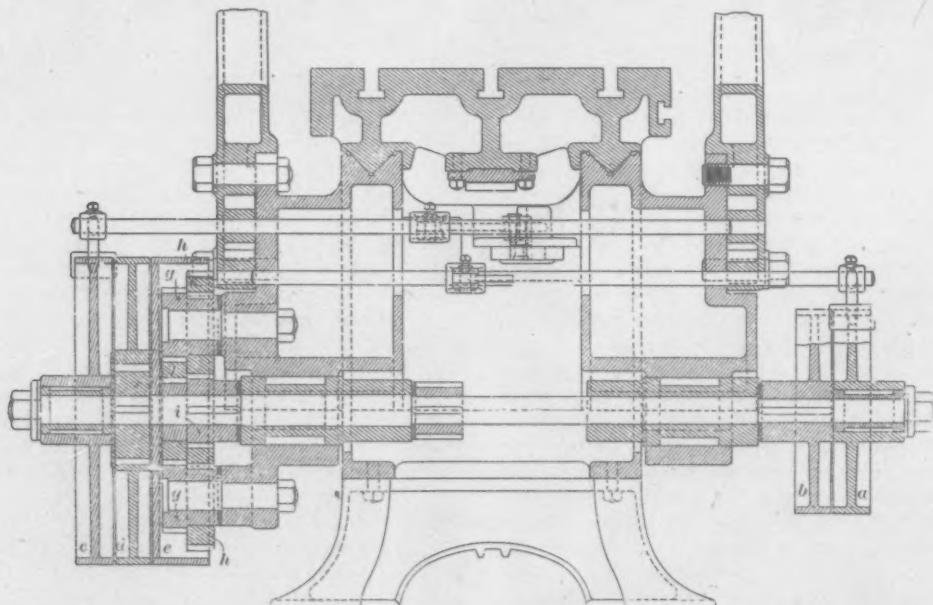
Section Through the Driving Shaft of the Powell High Speed Accelerating Cut Planer.
